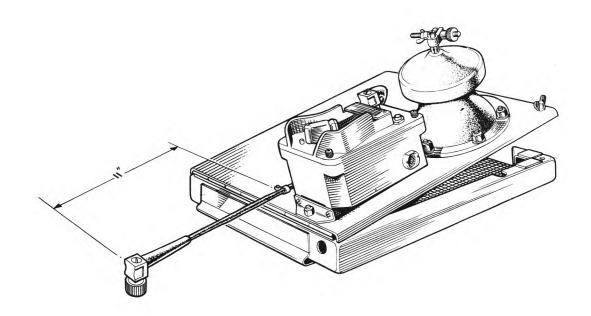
AERIAL BASE AND COUPLING UNIT ASSEMBLY WITH CABLE
